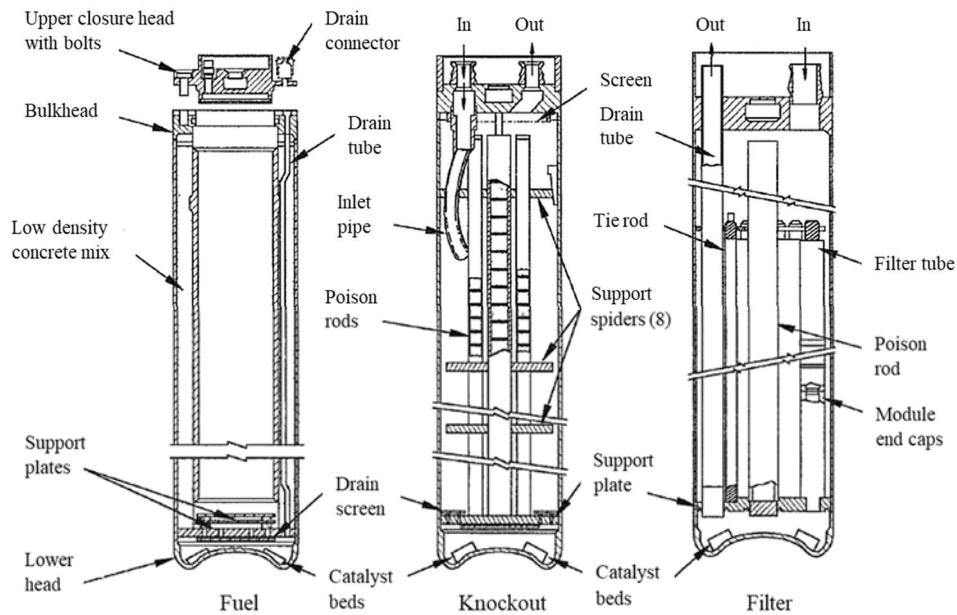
Fuel debris, knockout, and filter canisters elevation view (courtesy of INL).
